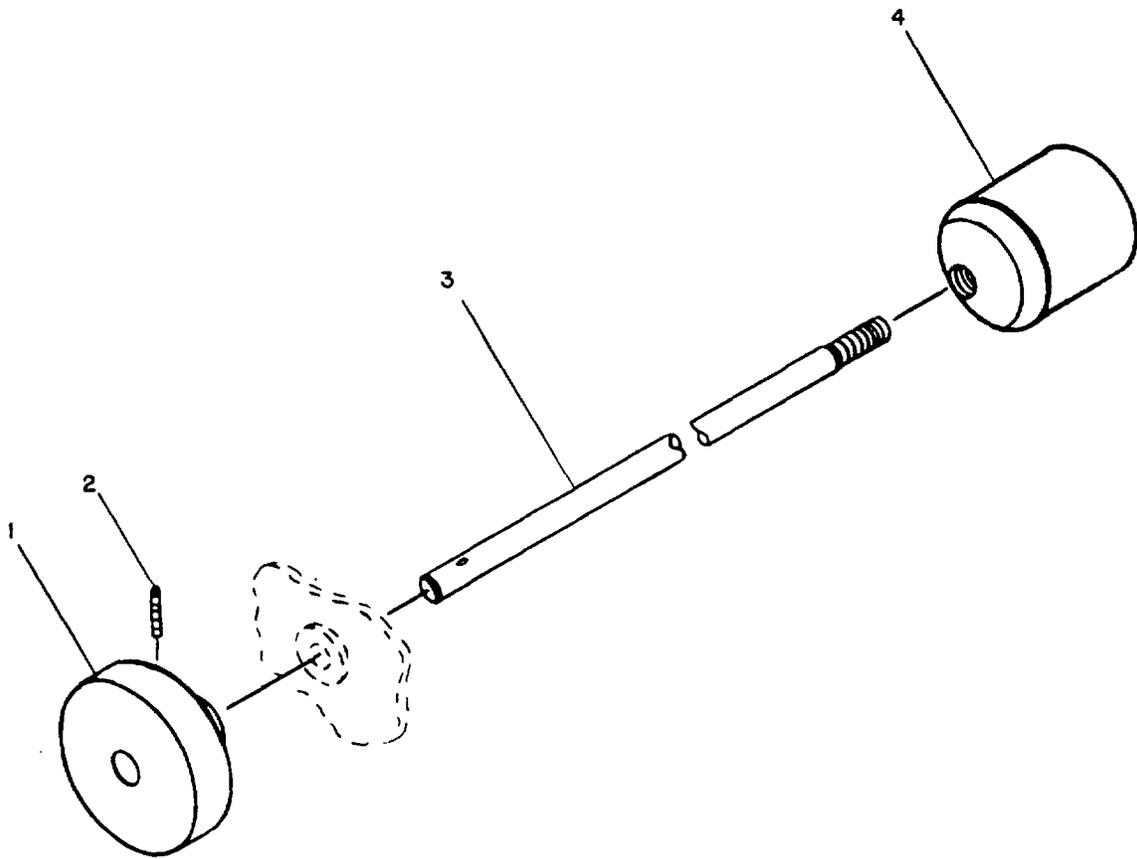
COMPENSATOR CONTROL ASSEMBLY
